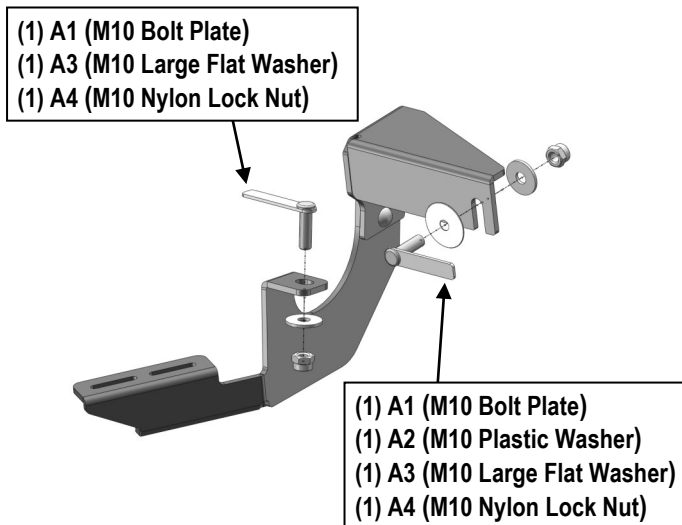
M10 Bolt Plates installed (On Passenger Front Mounting Bracket Location)
